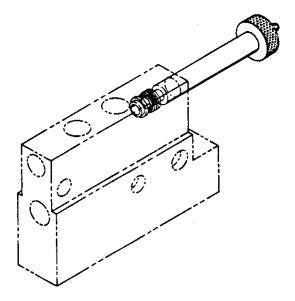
Removal of Sleeve, Part No. 42568. Using Sleeve Puller T42568
